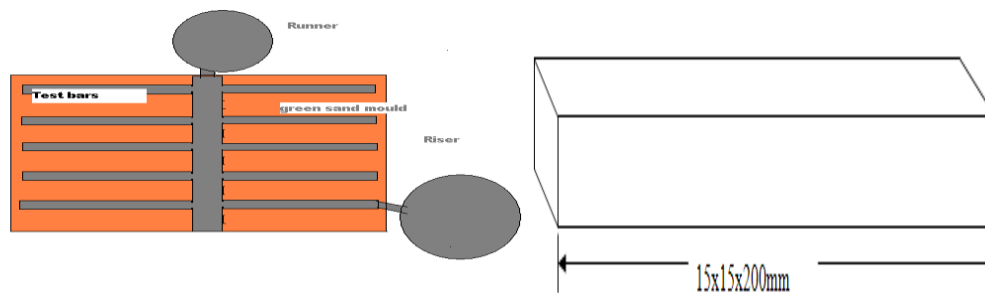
(a). Sample Casting Green Sand Mould Figure 1(b). Sample Test Bars
